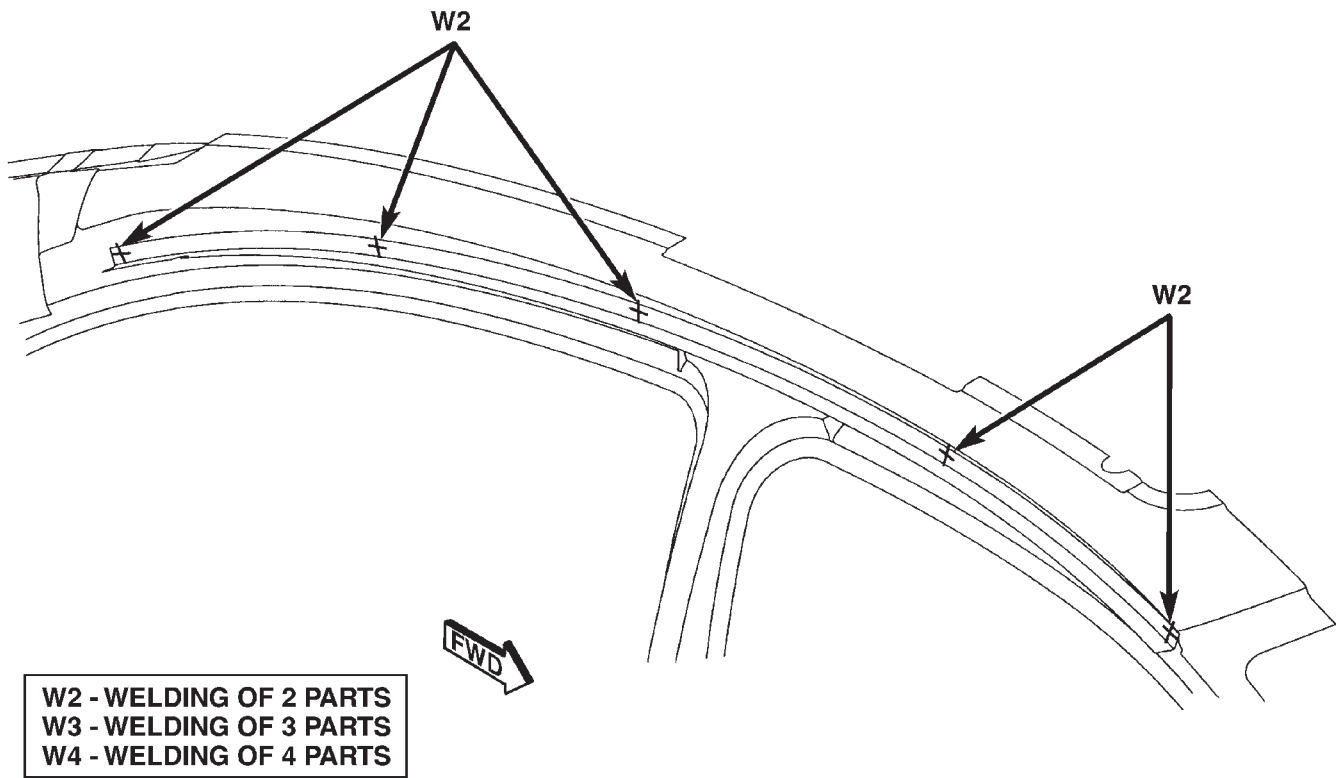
DRIP RAIL/ROOF SUPPORT TO BODY SIDE APERTURE
